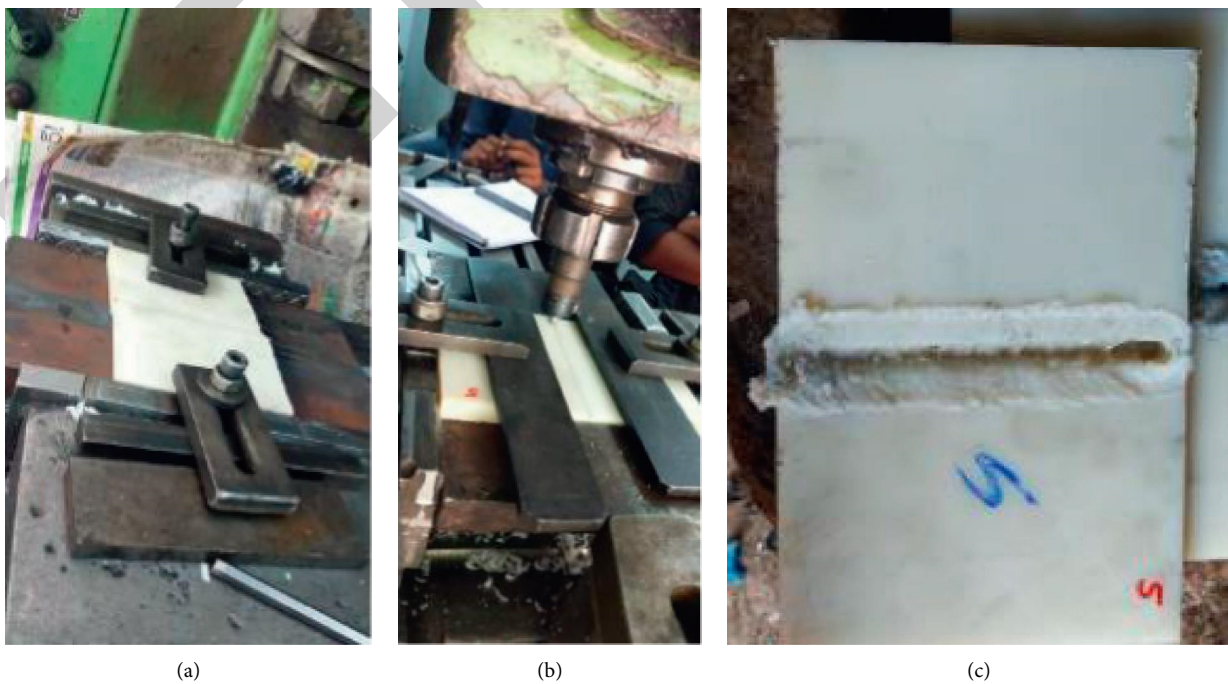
(a) Workpiece clamping. (b) FSW process. (c) Final specimen joint.
